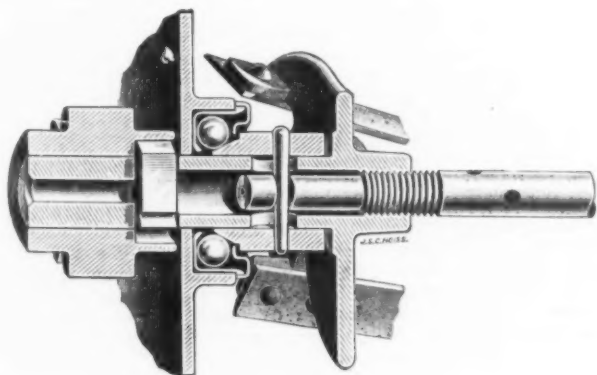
Sectional View of Ball Bearing Adjustment.
